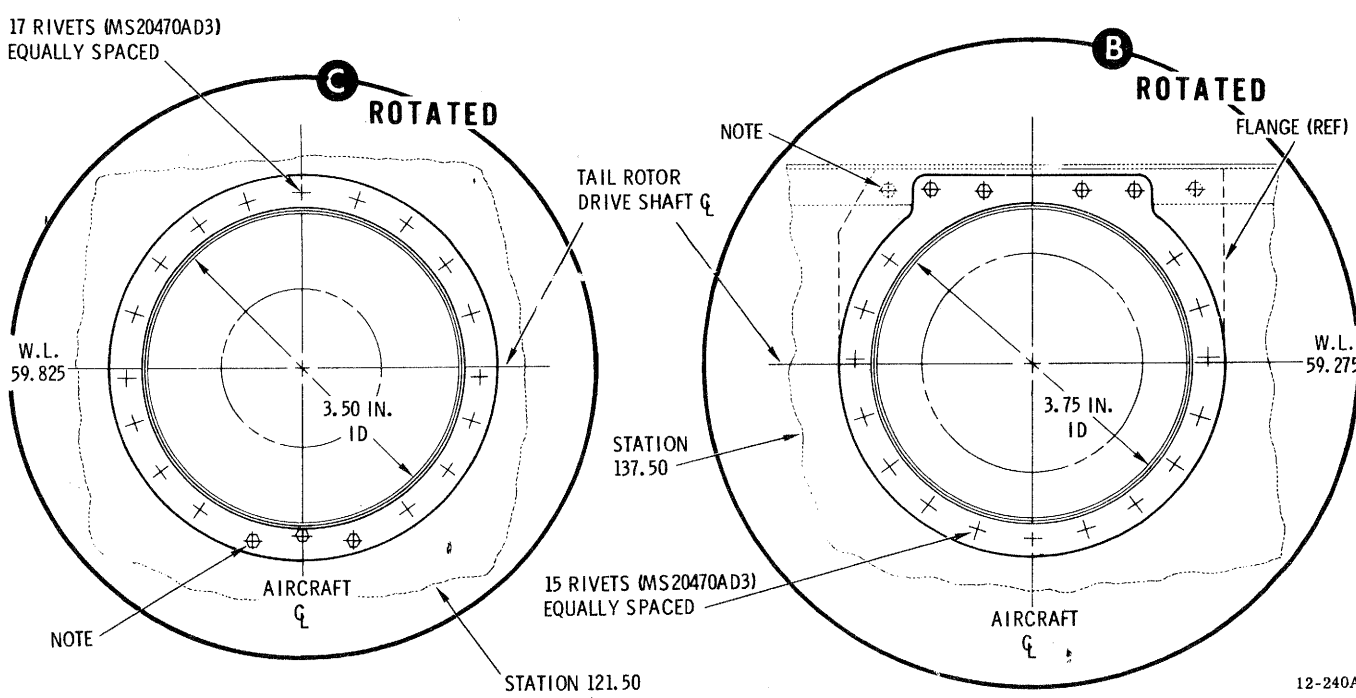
Tail Rotor Drive Shaft Fairing Repair and Replacement.
